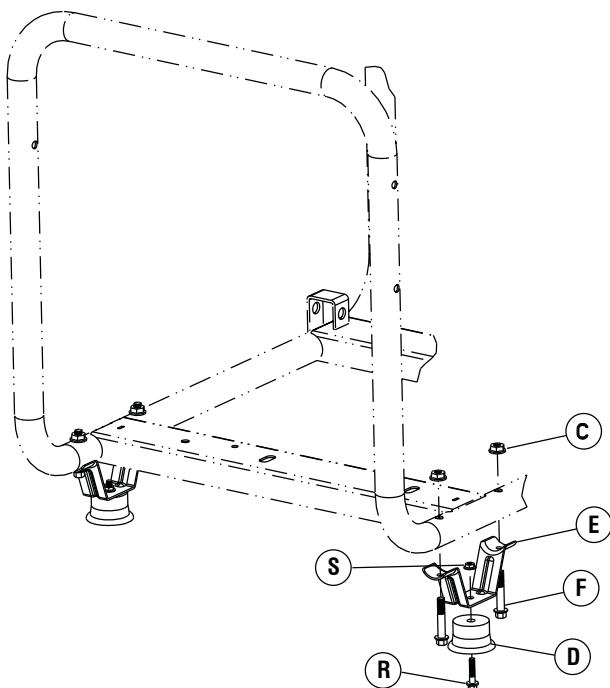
A – Handle Assembly (GP5000/GP6000)
